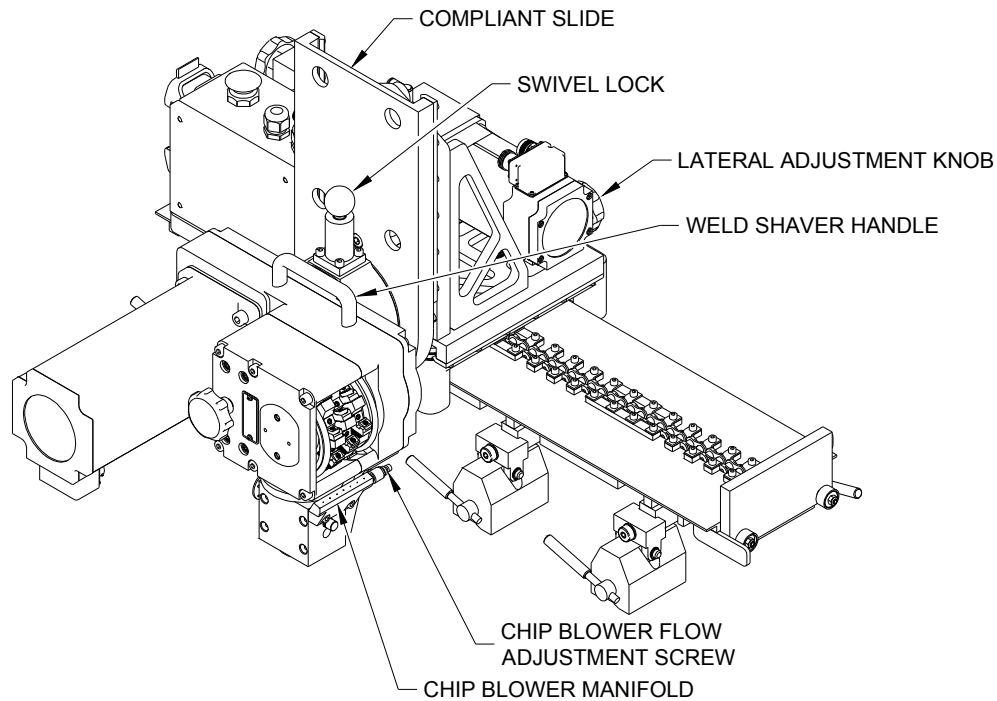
Chip Blower Flow Adjustment and Weld Shaver Lateral Adjustment
